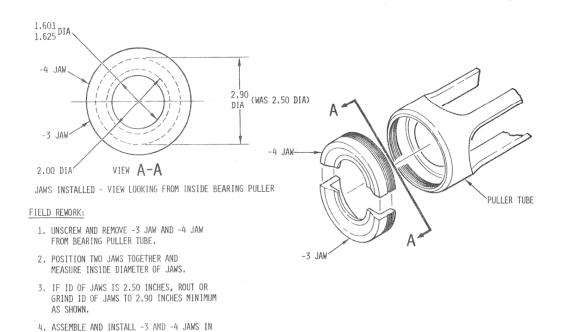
Rework of PN 269A9239 Bearing Puller Special Tool
